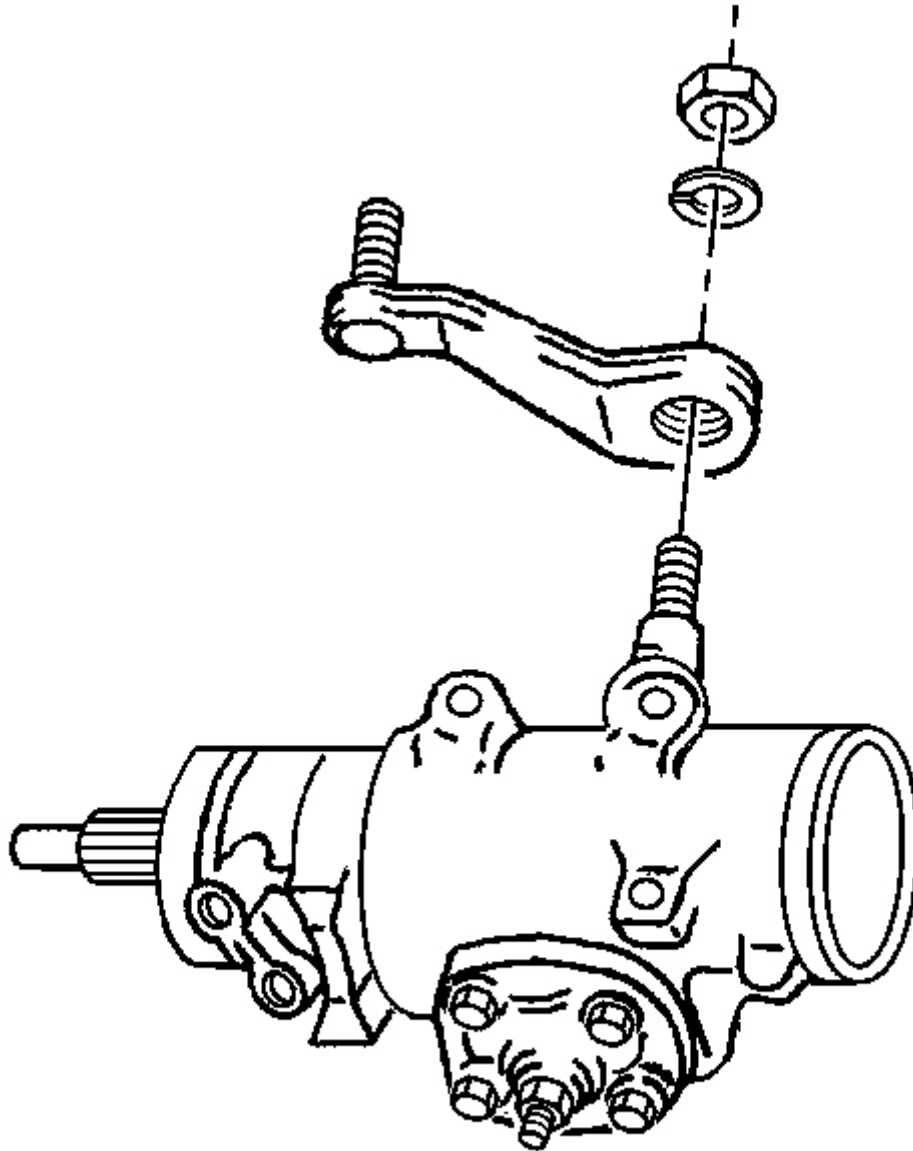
Remove The Pitman Arm From The Power Steering Gear (Non Rack and Pinion)
